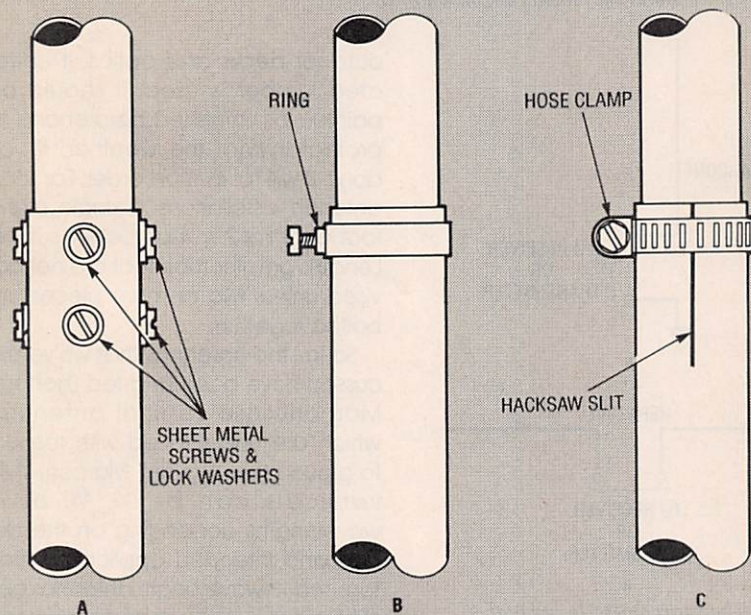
Putting two pieces of pipe or tubing together is one thing, keeping them together is quite another. Several approaches can be used to secure a joint: in A, several sets of sheet metal screws are used; in B a ring collar with a set screw is used; and in C an automotive hose clamp keeps the joint secure.
